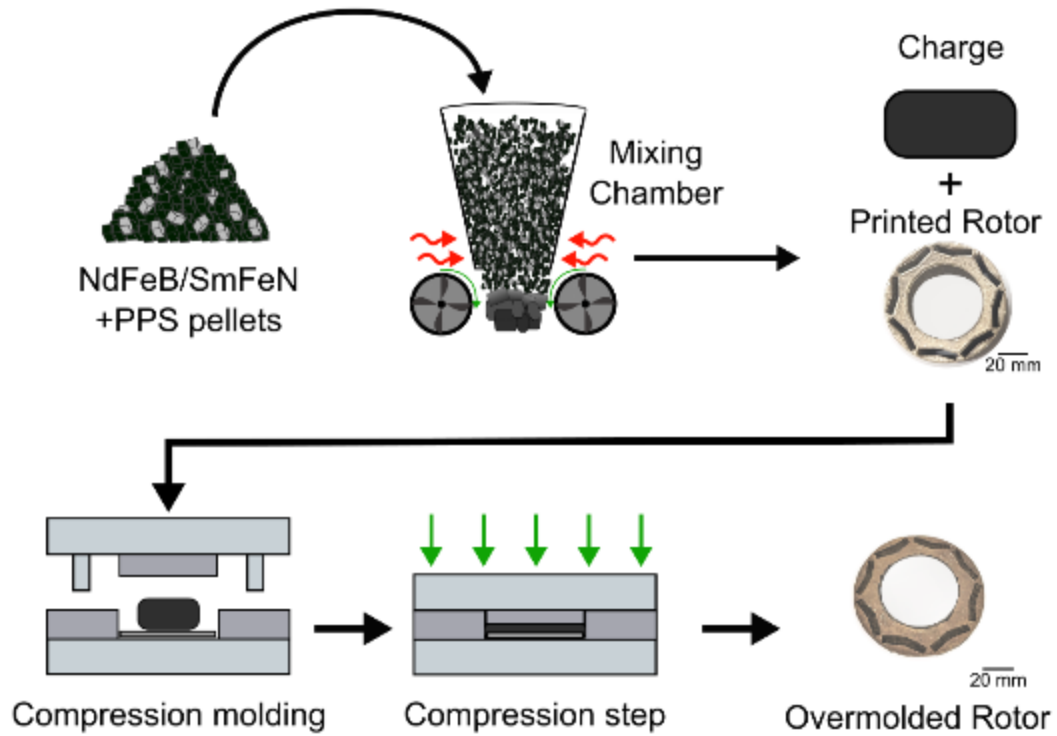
Schematic flow-chart of heating as-received composite magnetic pellets to final insert/over-molding of the printed Fe-3Si rotor. The charge is placed on top of the insert in a preheated mold before compression molding.
